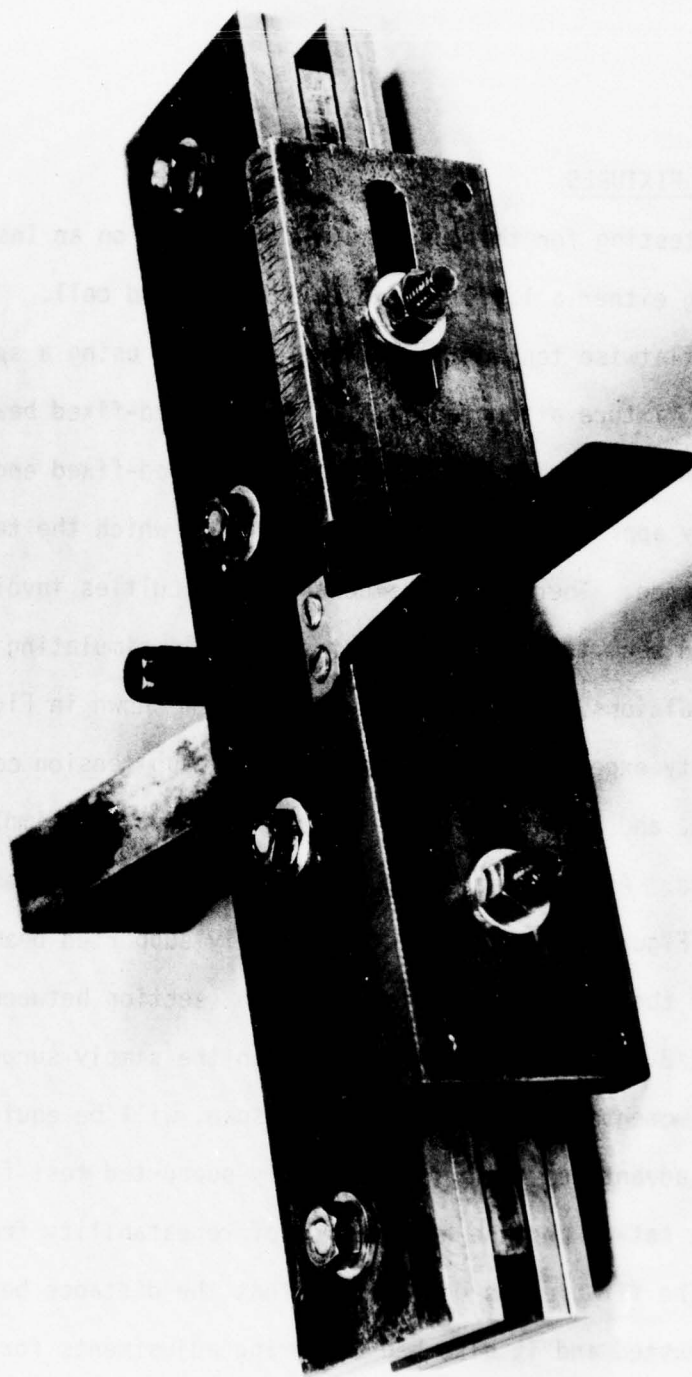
Flatwise Tension Fixture/Clamped Edges
